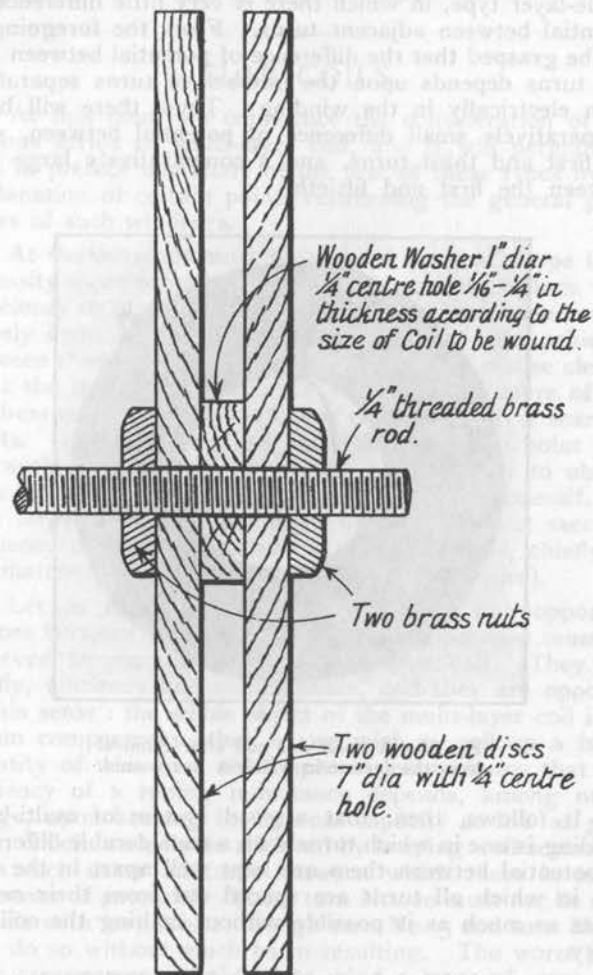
A former for winding slab coils. In the absence of a lathe the parts can be cut out with a fret saw.
